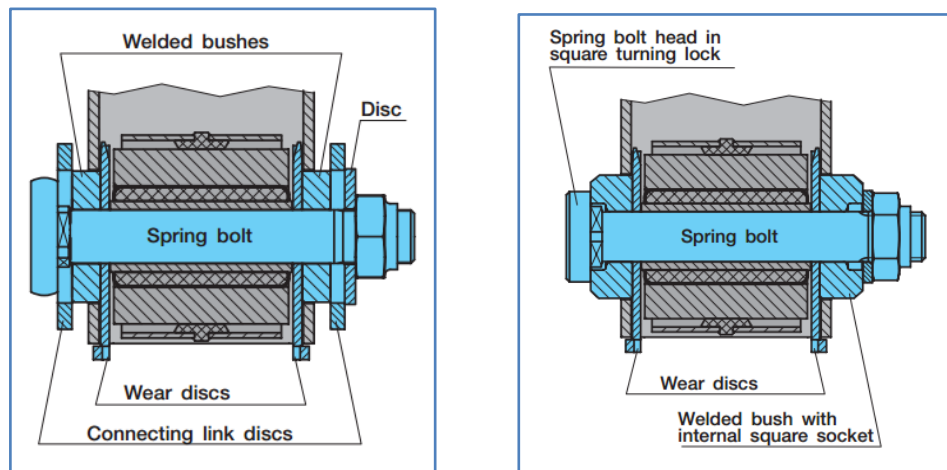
Adjustable hanger bracket pivot bolt assembly (Left) and Fixed hanger bracket pivot bolt assembly (Right)
